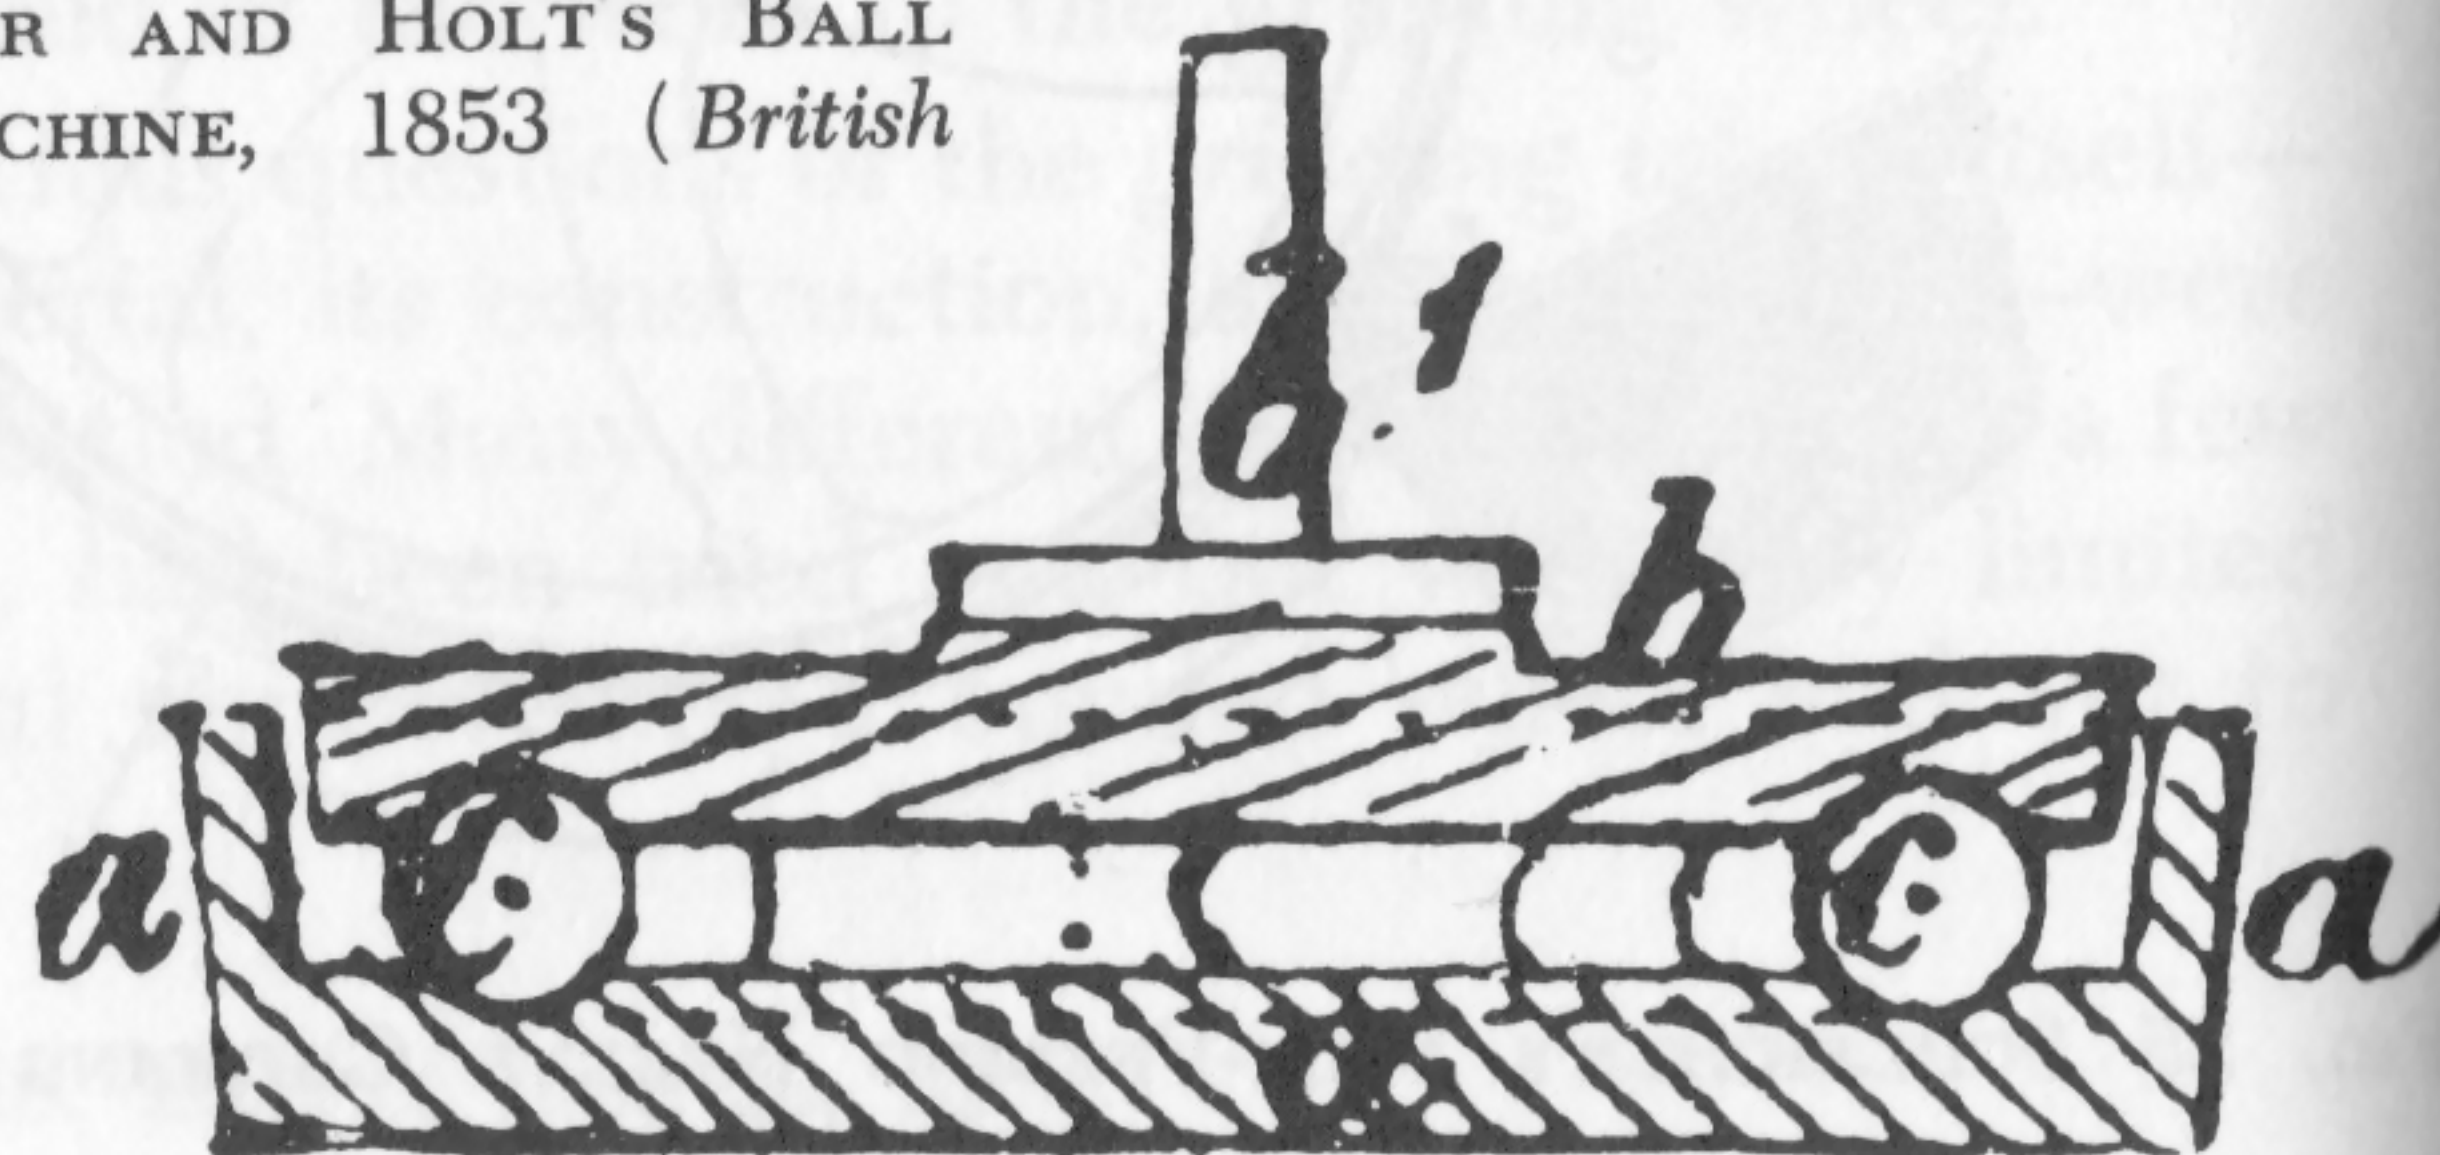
BARKER AND HOLT'S BALL GRINDING MACHINE, 1853 (*British Patent*)
